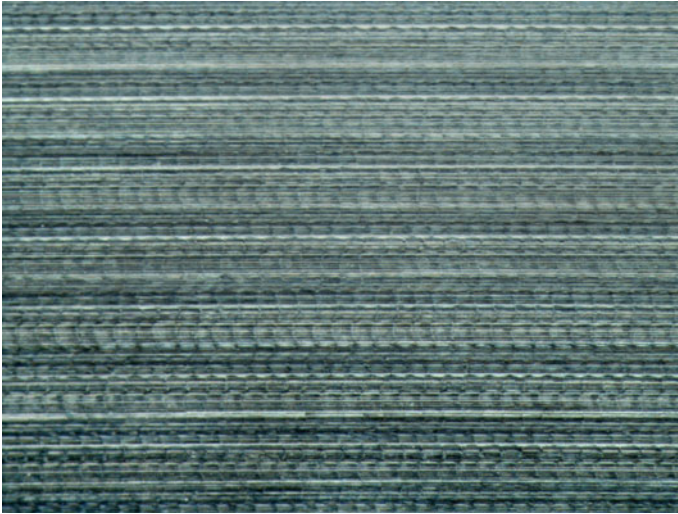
Typical plane tooth flank of an IPB wheel finished by one path of cutting with a $\varnothing 8$ mm flat end mill
